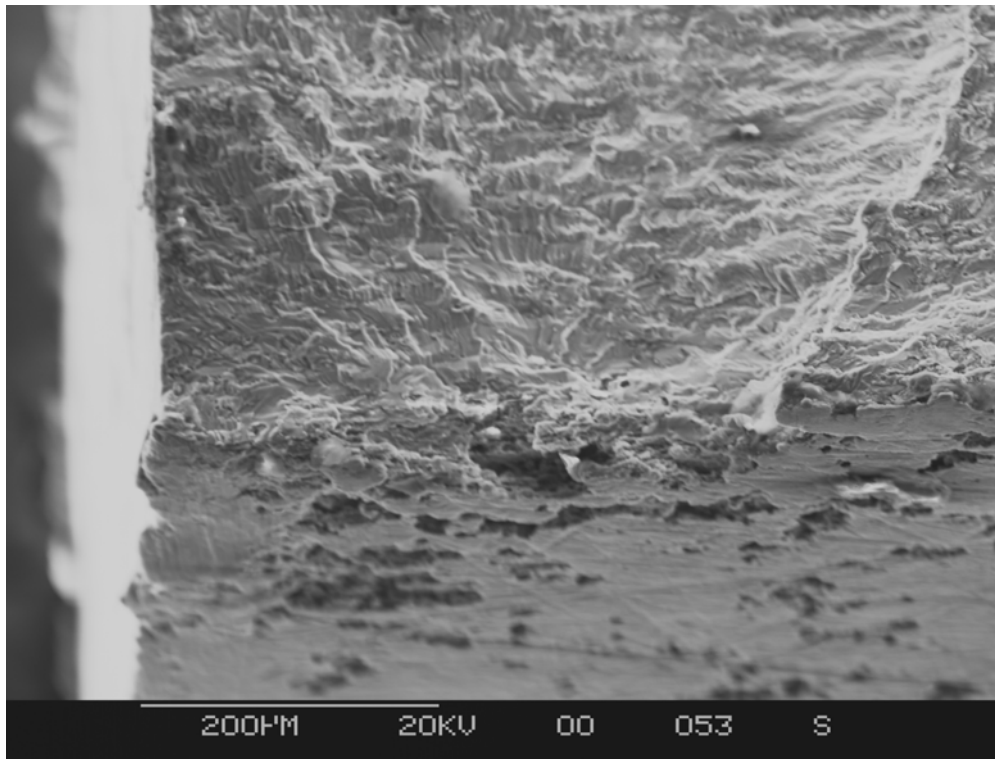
Surface View of Crack Origin A on Specimen 5967.
